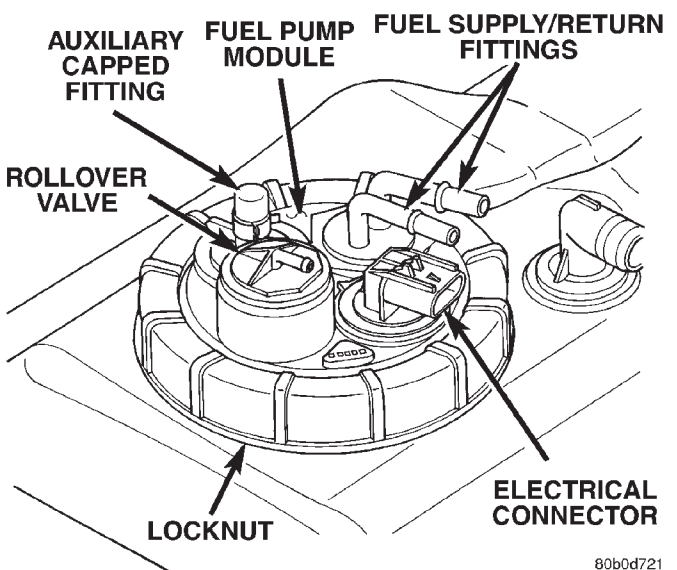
Fuel Pump Module—Gas Engine With 26 or 34 Gallon Tank
